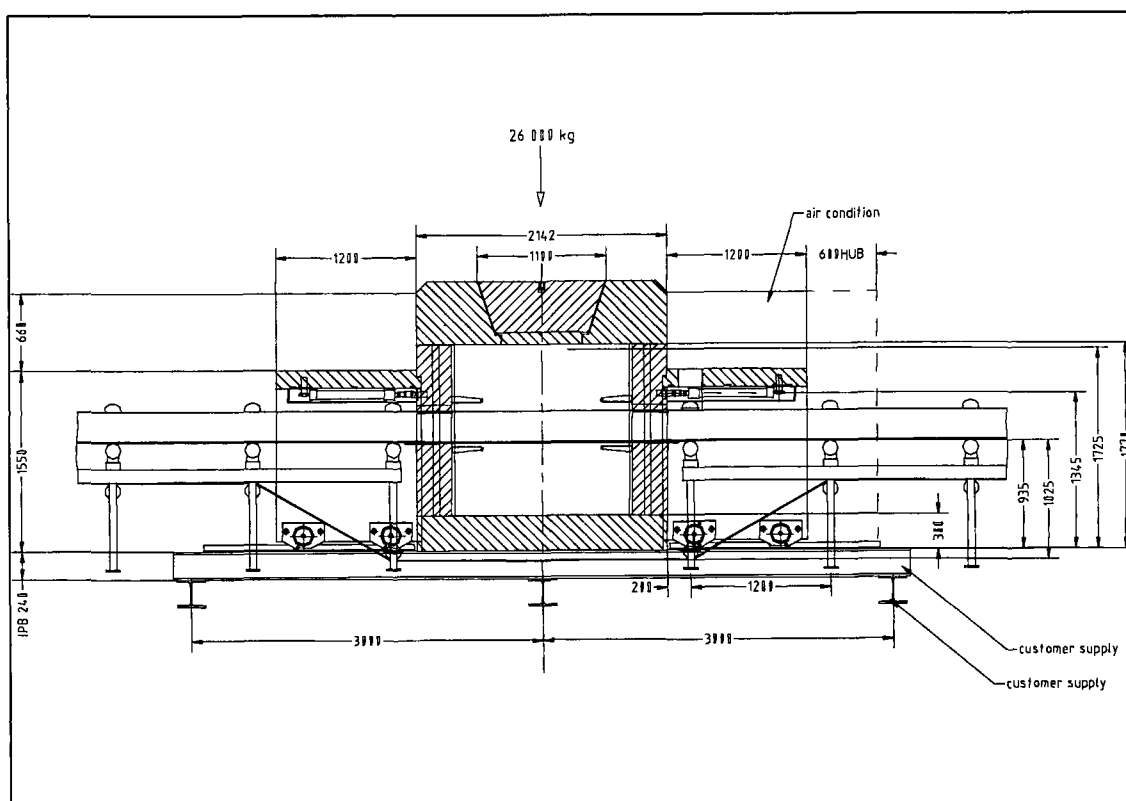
CNA and conveyor framework with deflection rollers (dimension drawing)
